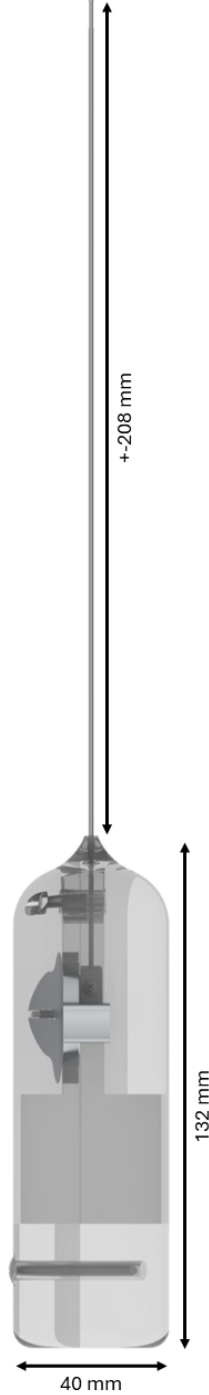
Side view of the fully assembled handpiece, showing the internal differential actuator and the attached steerable needle.
